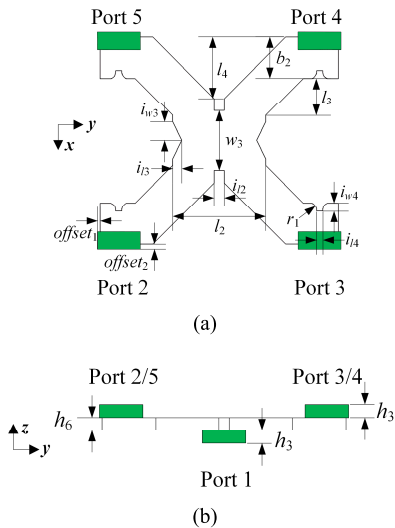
Geometry of the air-filled waveguide X-junction. (a) Top view with dimensions, (b) side view with dimensions.
